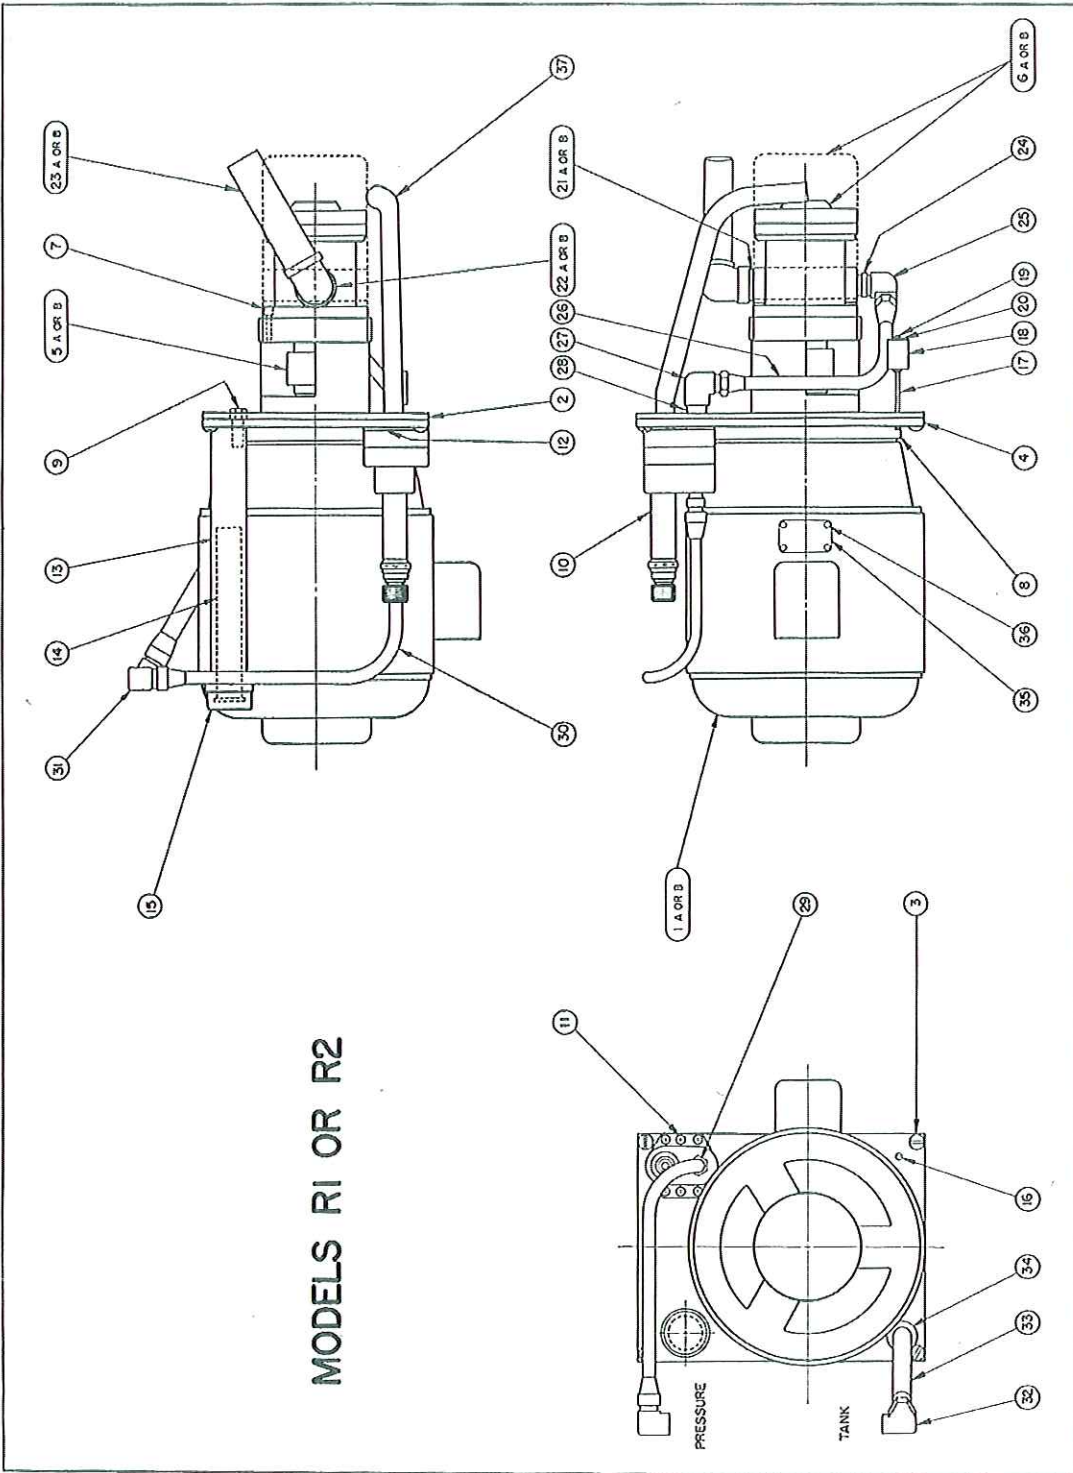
Motor and Pump Assembly for 4- or 6-ton models.
